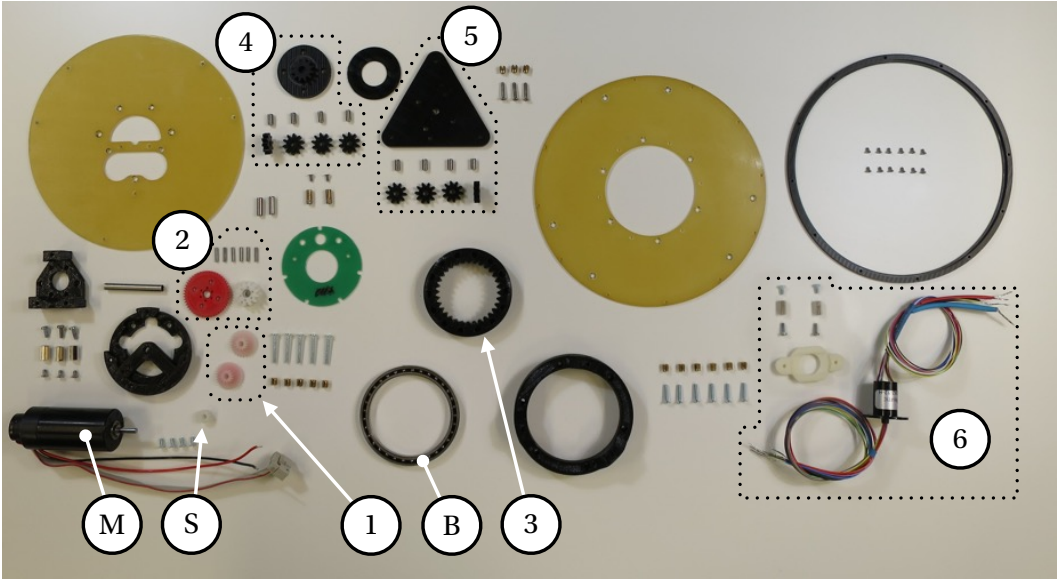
95 elements necessary to assemble Gearbox B. 13 additional elements are needed to assemble the POM ring (top-right of the figure). The labels correspond to the labels of the exploded view in Figure 4.1. Gears (S), (1), and in the assembly (2) are off-the-shelf. Gears in the assemblies (4) and (5) are machine-milled in POM. Annulus gear (3) is 3D printed.
